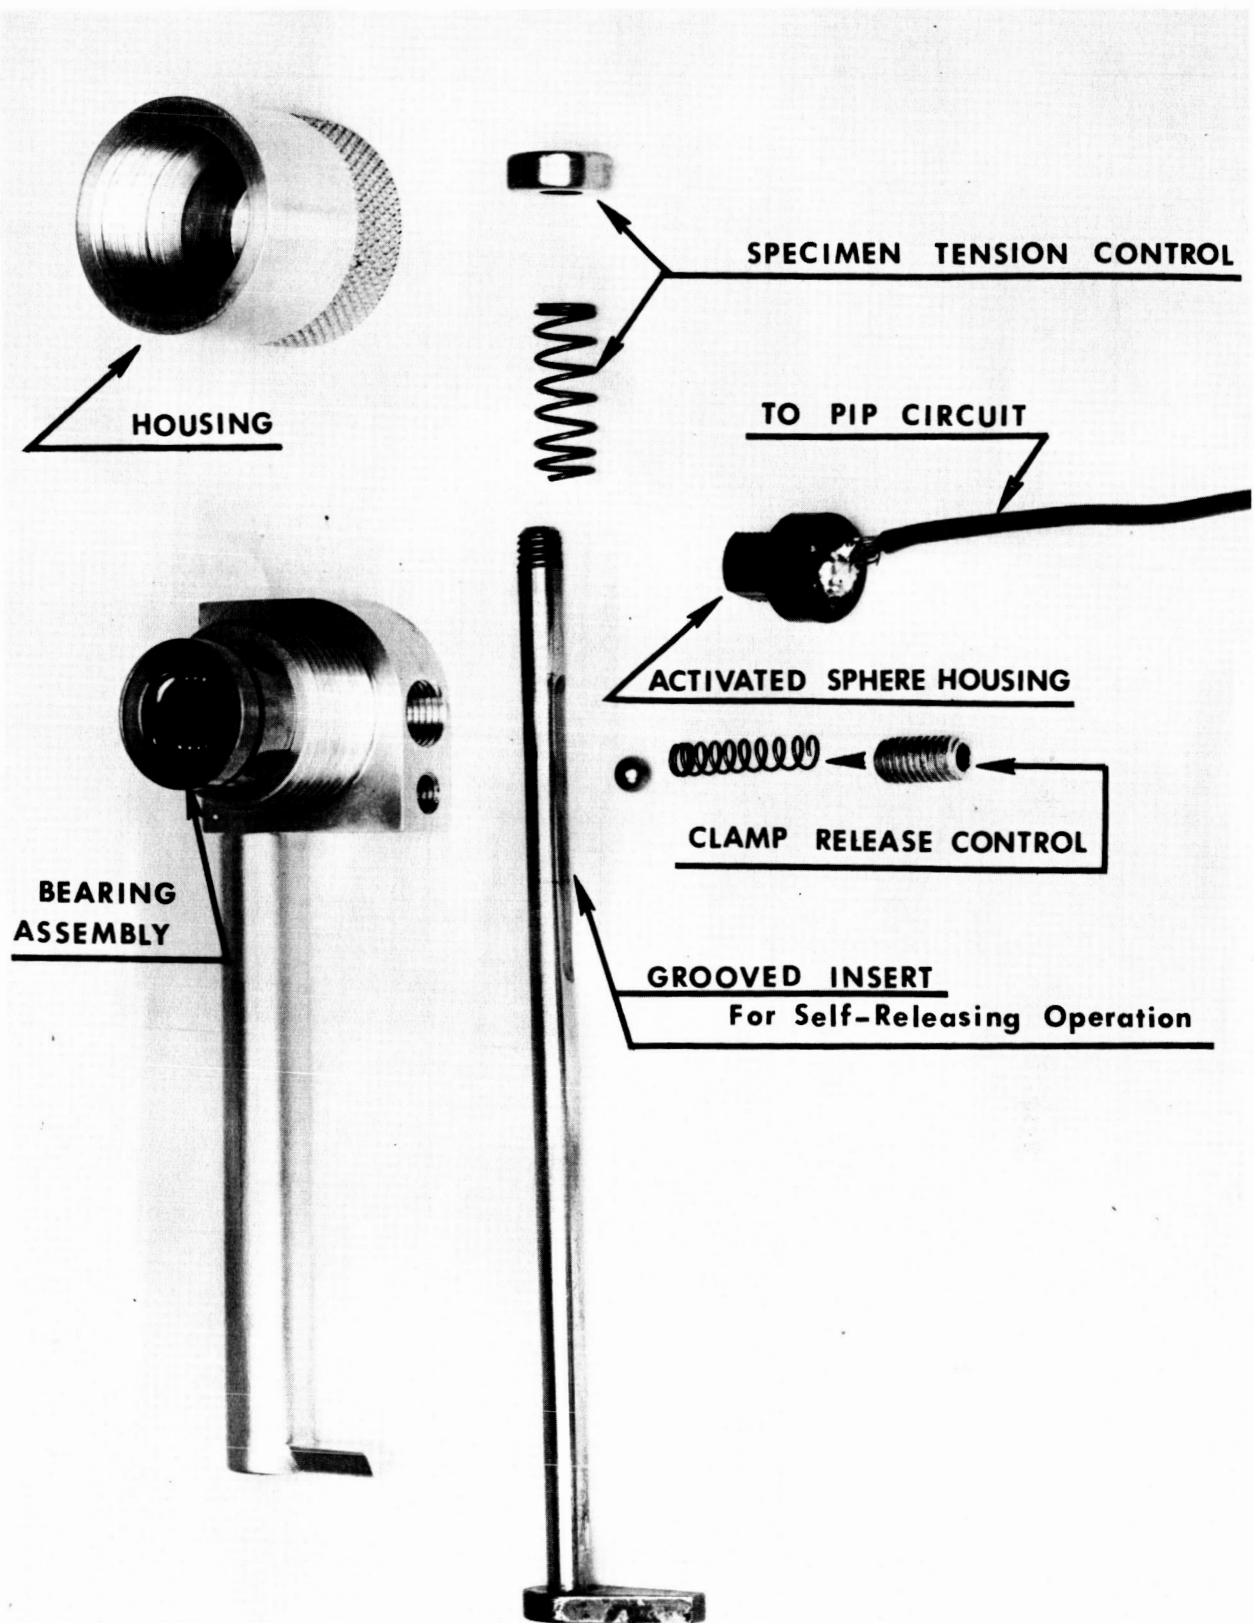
LOWER CLAMP DISASSEMBLED
